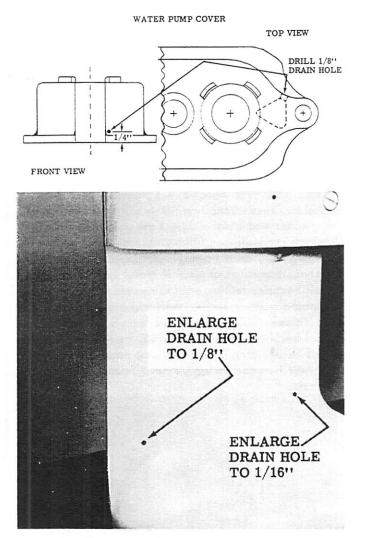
Drill Holes for Water Pump Housing and Gear Housing
